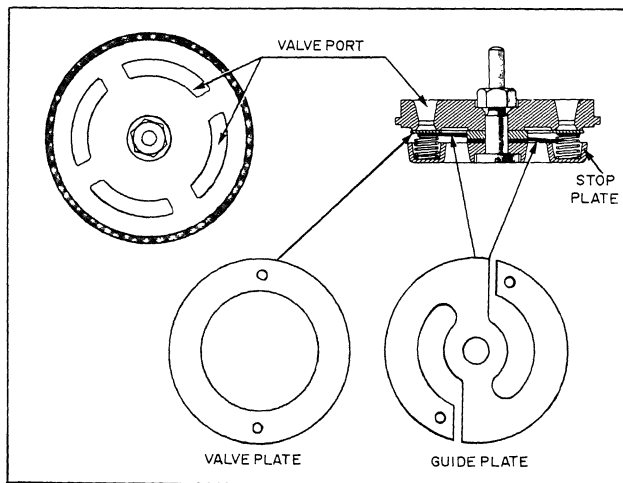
Thin plate, low-lift, compressor valve assembly.
